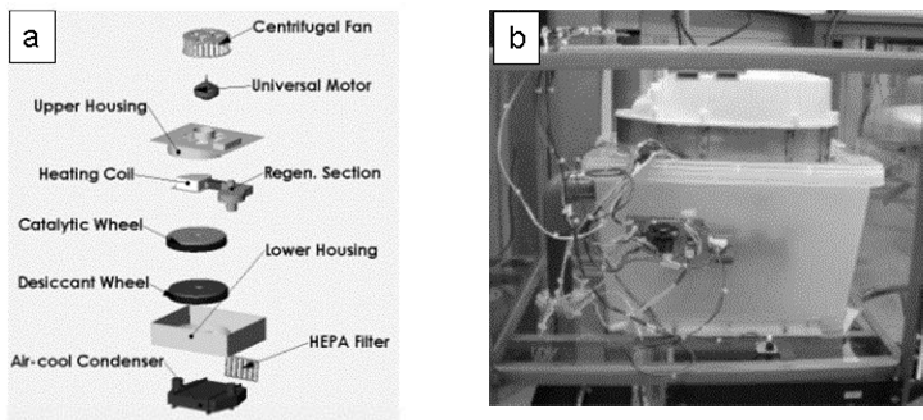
(a) schematic drawing of component parts and their arrangement in the prototype unit design 1 and (b) a picture of the assembled prototype.
